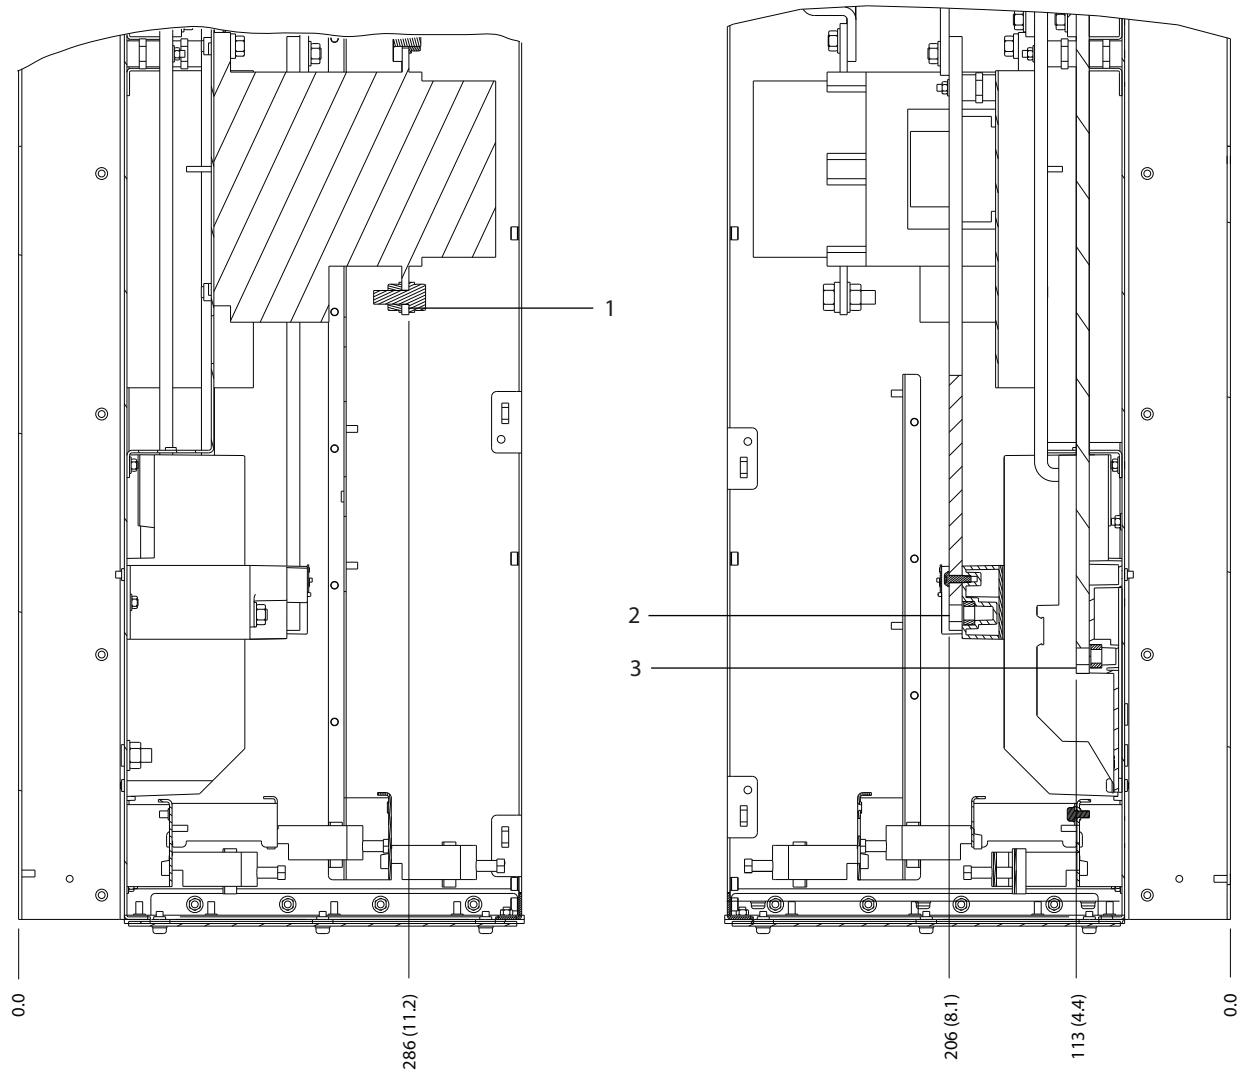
D5h Terminal Dimensions with Brake Option (Side Views)
